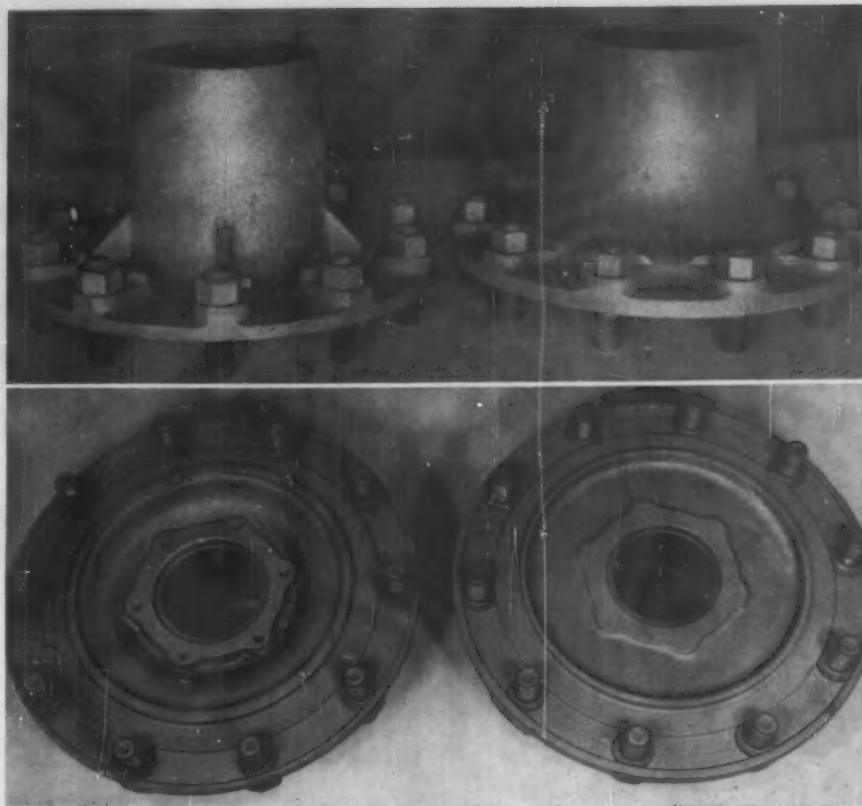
Determination of stresses in hub casting showed where shape could be altered to improve design with sweeping lines and flat surfaces.
